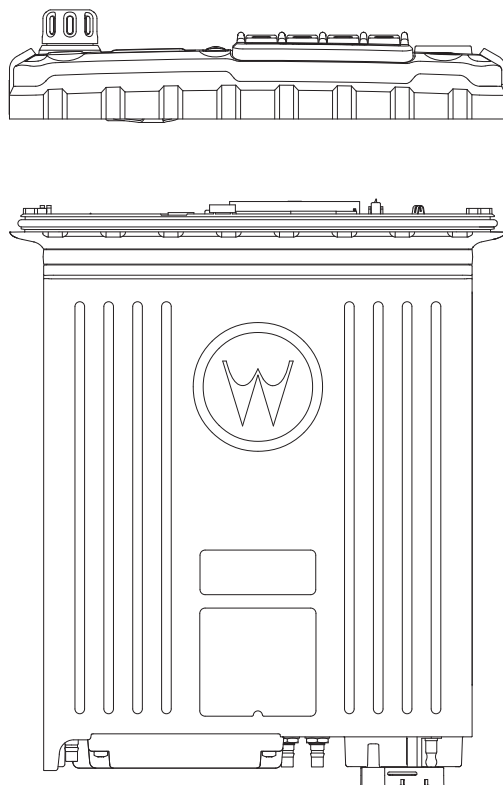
Attaching the Front Housing Assembly to the Back Housing Assembly
